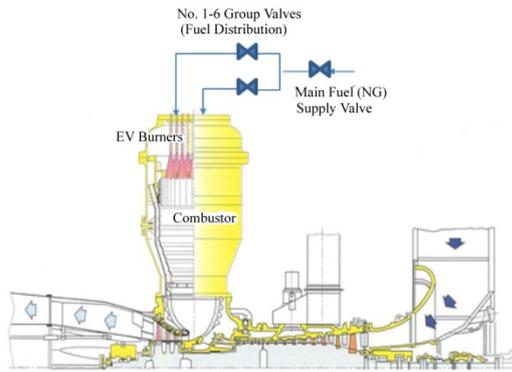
Cut-away view of a silo-type gas turbine combustor being studied.
